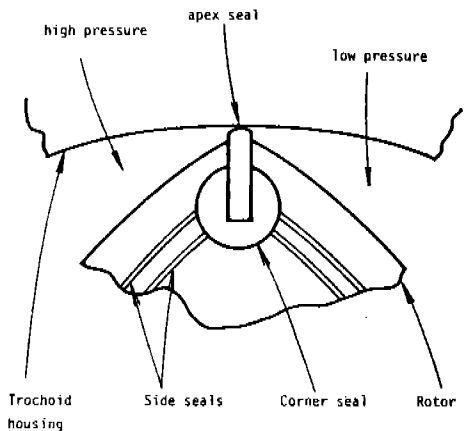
Typical view of a installed apex seal in the rotary engine.
